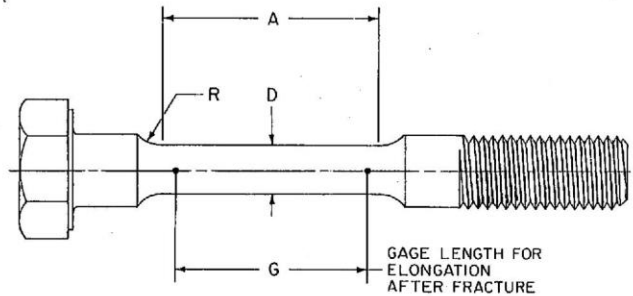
TENSILE TEST SPECIMEN FOR BOLTS OR SCREWS WITH TURNED DOWN SHANK
